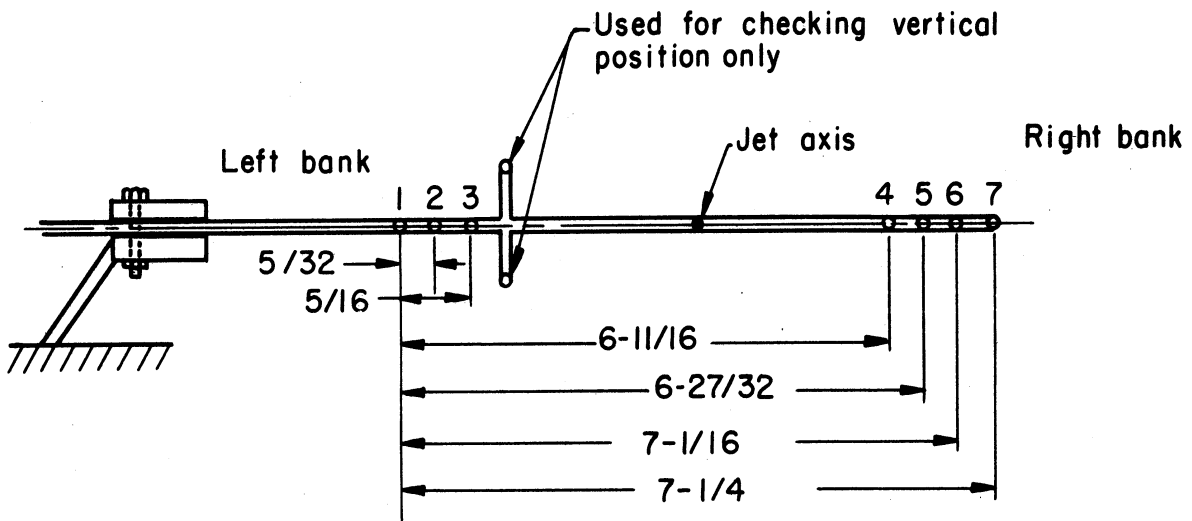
B. End view of total head rake assembly as viewed from the nozzle; the probe spacing is that arrived at for the 20-in. position.
